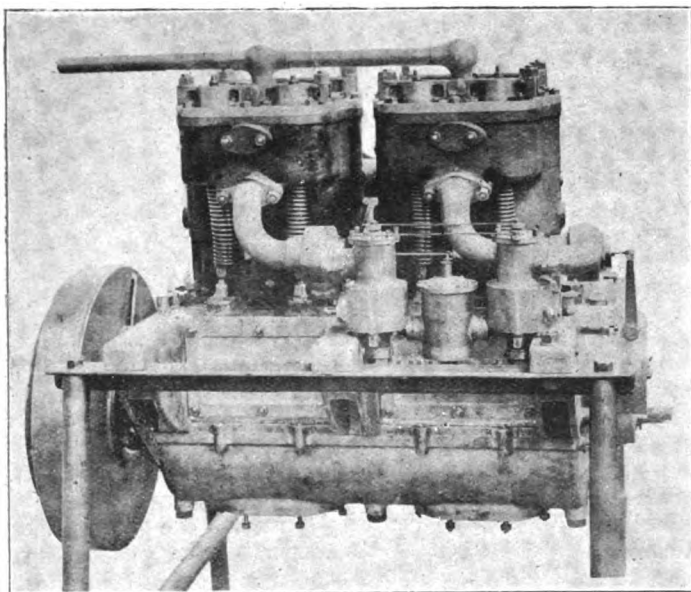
GENERAL VIEW OF HUMBER 20-H.P. FOUR-CYLINDER MOTOR—INLET VALVE SIDE.
